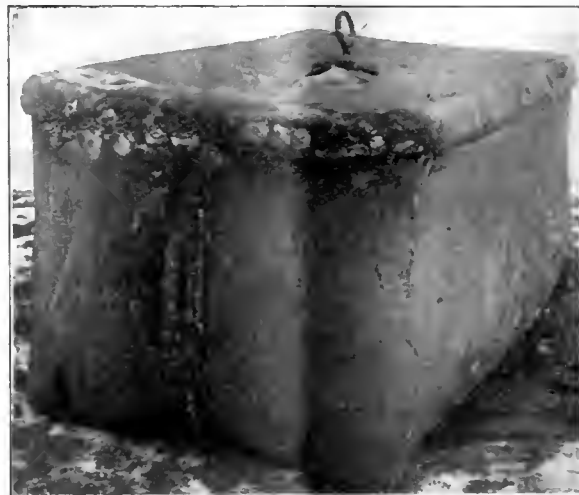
ANNEALING BOX WITH HOLE WELDED IN CORNER, RIVETS BUILT UP AND PLATES WELDED AND FILLED IN AT JOINTS.
